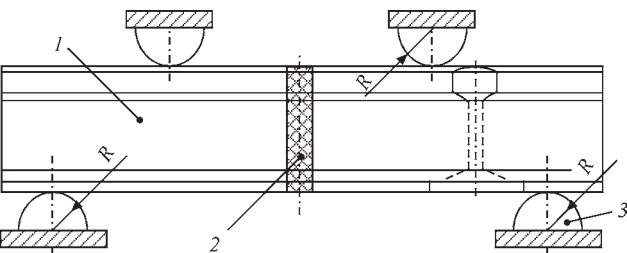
Fatigue strength testing of a welded joint: *1* — side view; *2* — weld; *3* — support
